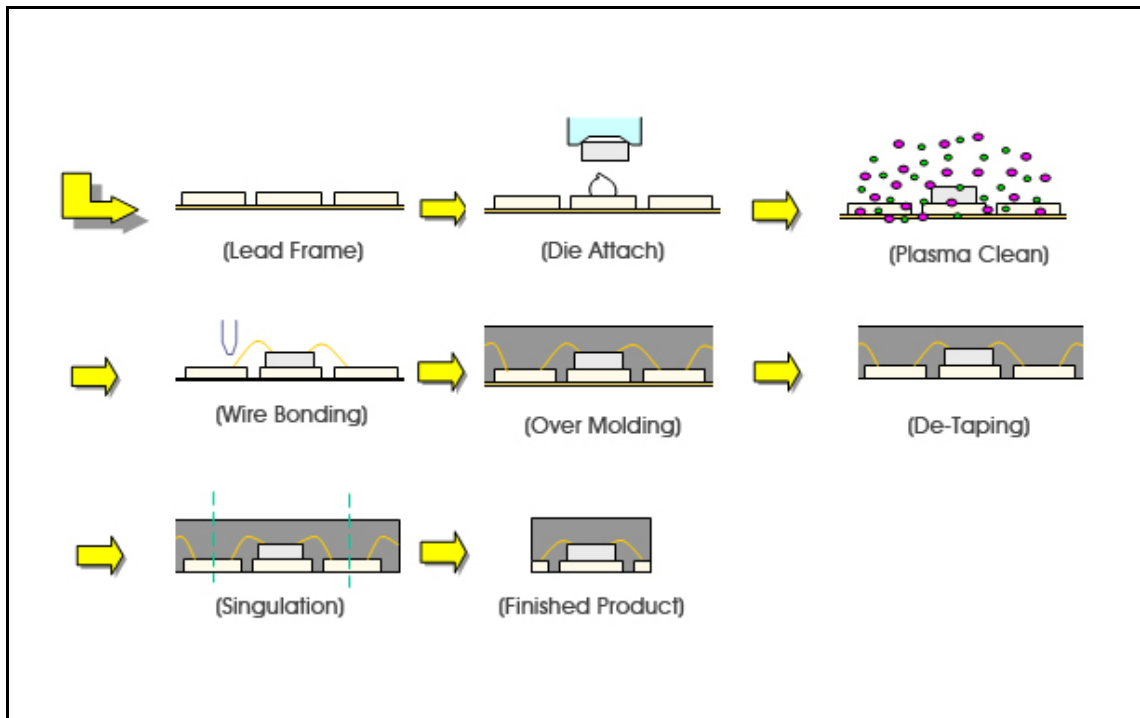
Assembly flow for QFN (<http://advanpack.com>)
